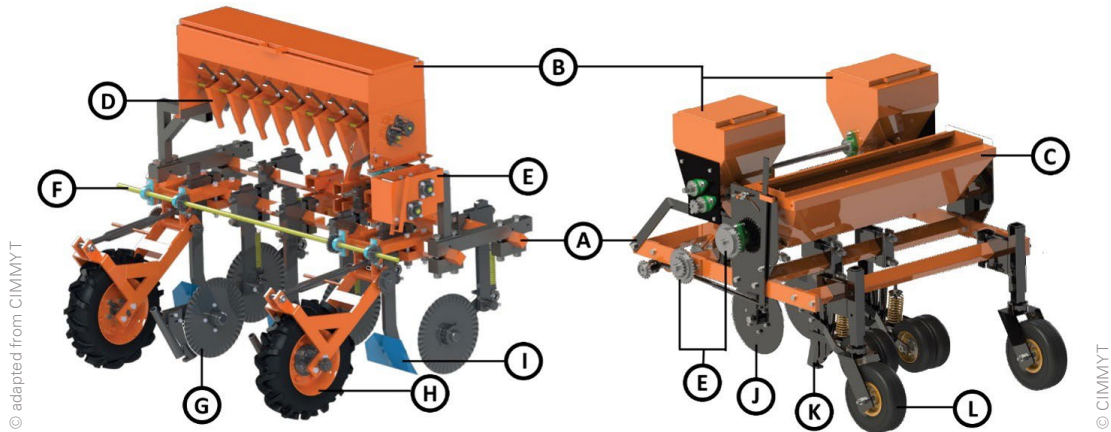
Fertilizer machine to be attached on 4WT (left) and 2WT seeder/fertilizer equipment (right), with (A) toolbar frame, (B) fertilizer bins, (C) seed container, (D) fertilizer metreing system, (E) calibration box, (F) principal axle, (G) cutting disc with fertilizer tine, (H) traction wheel, (J) crop residue cutting disc, (K) dual seed/fertilizer tine, (L) depth control wheel.
